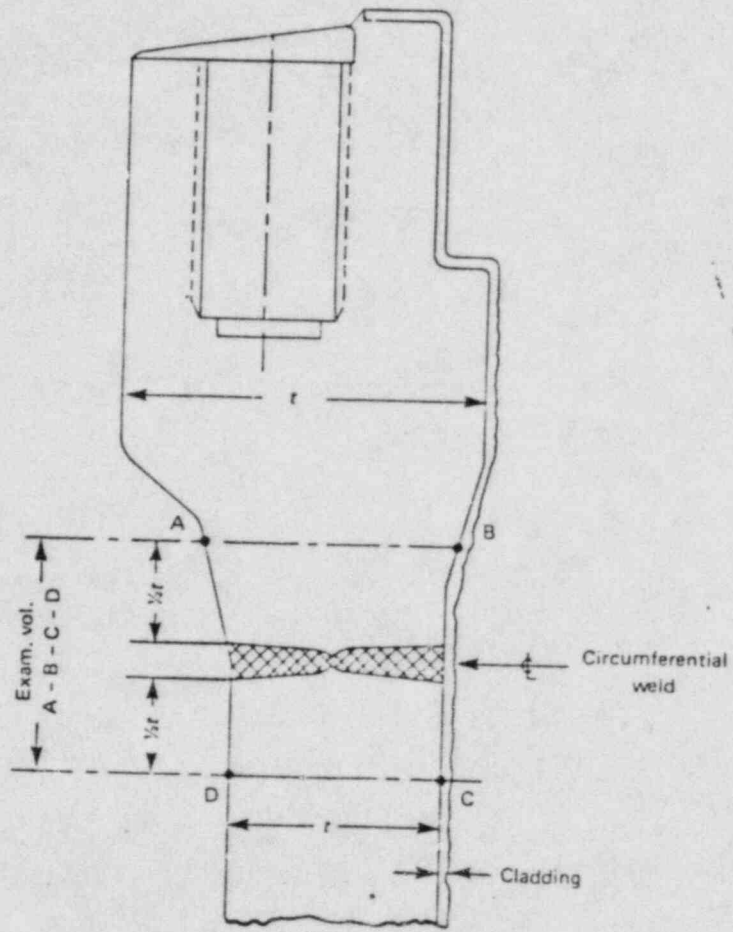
SHELL-TO-FLANGE WELD JOINT
